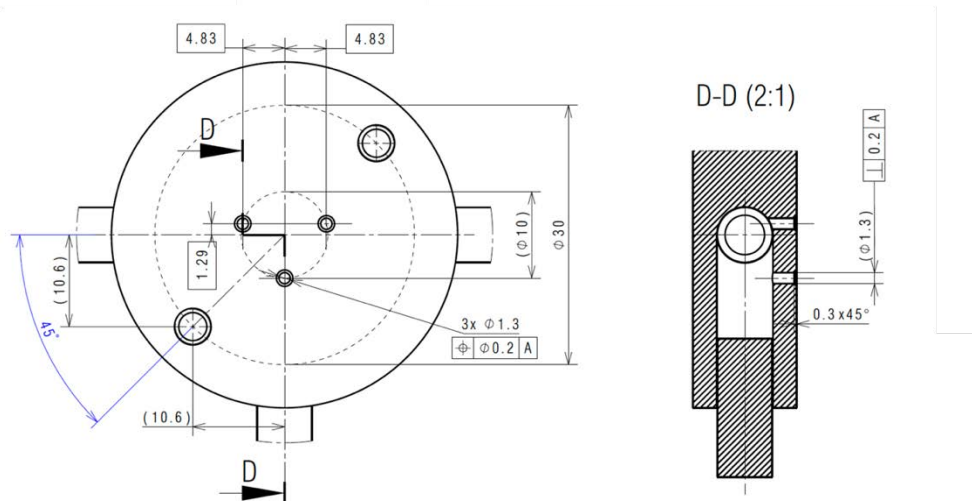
Technical drawing of gas manifolds with three gas ports for SOFC button cells.
